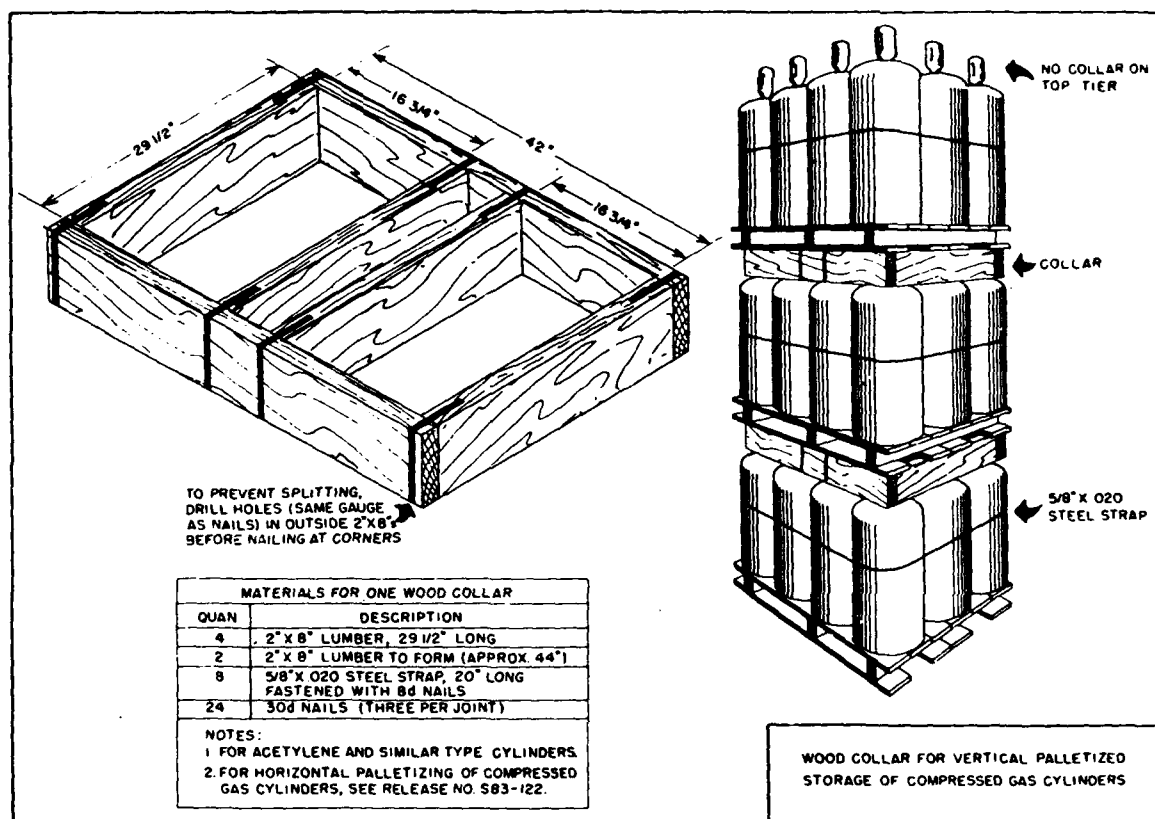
Wood collars for vertical palletized storage of acetylene cylinders.
